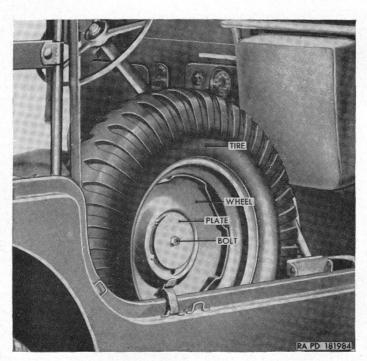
(Added) Spare wheel and tire assembly M170-installed.
